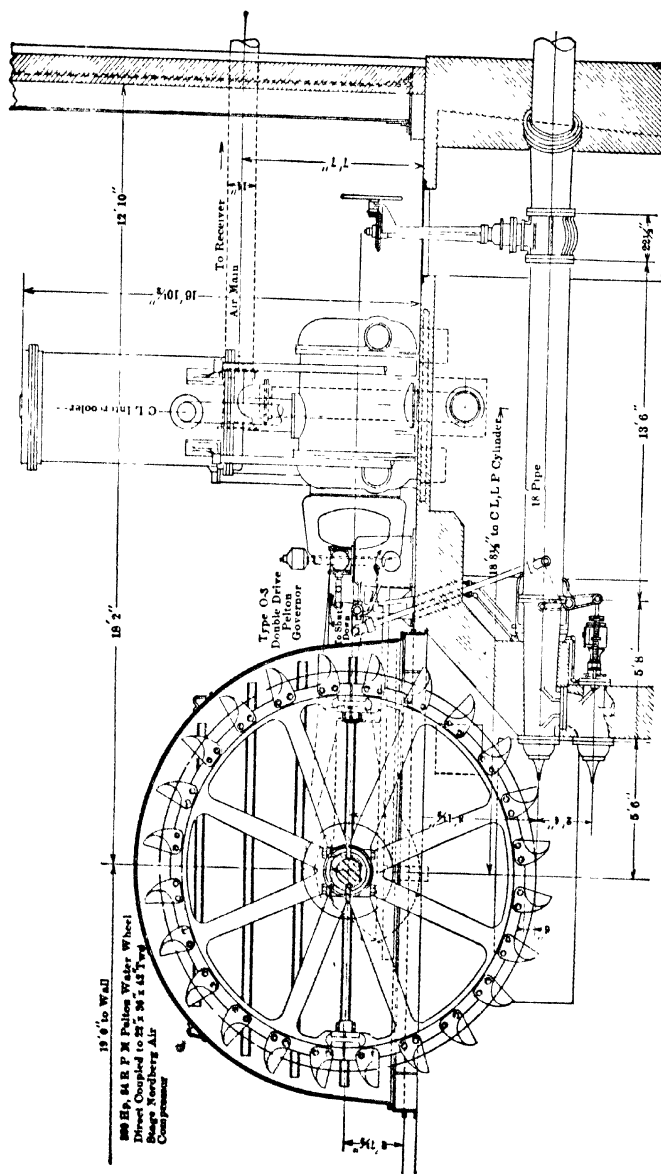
Nordberg Compressor, Direct-Connected to a Pelton Wheel
